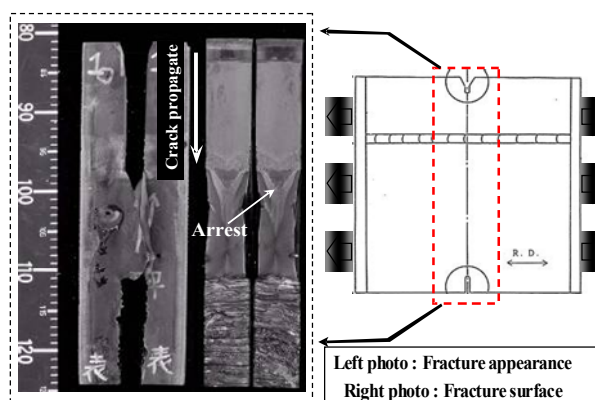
Example of fracture surface of duplex ESSO test (50mmt, -196deg.C)
